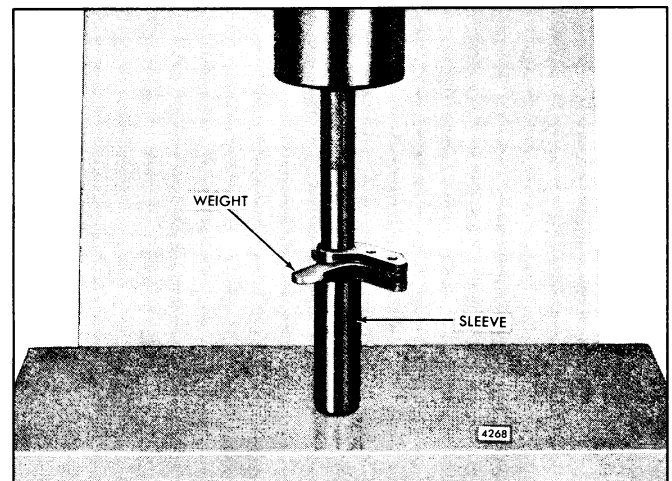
Installing Bushing In High-Speed Weight using Tool J 8985
